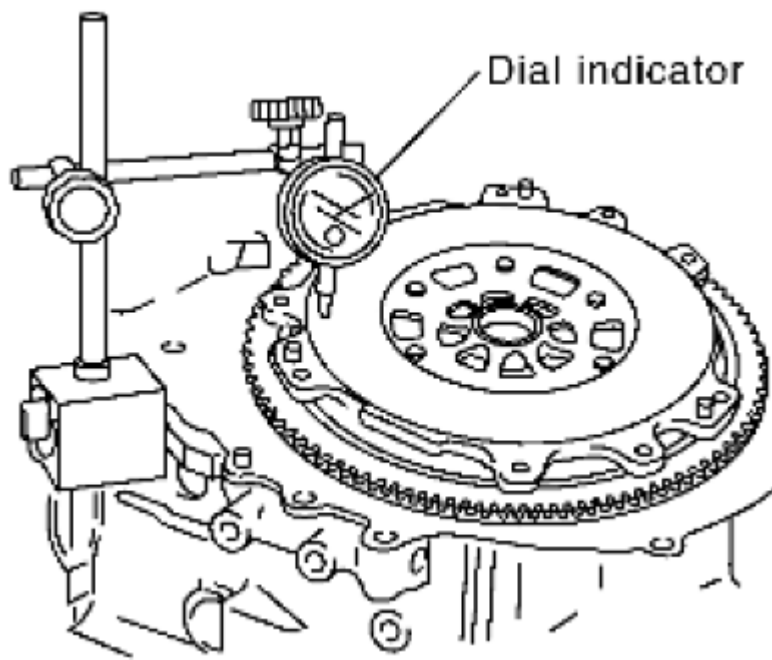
Measuring Deflection Of Flywheel Contact Surface To Clutch With Dial Gauge
